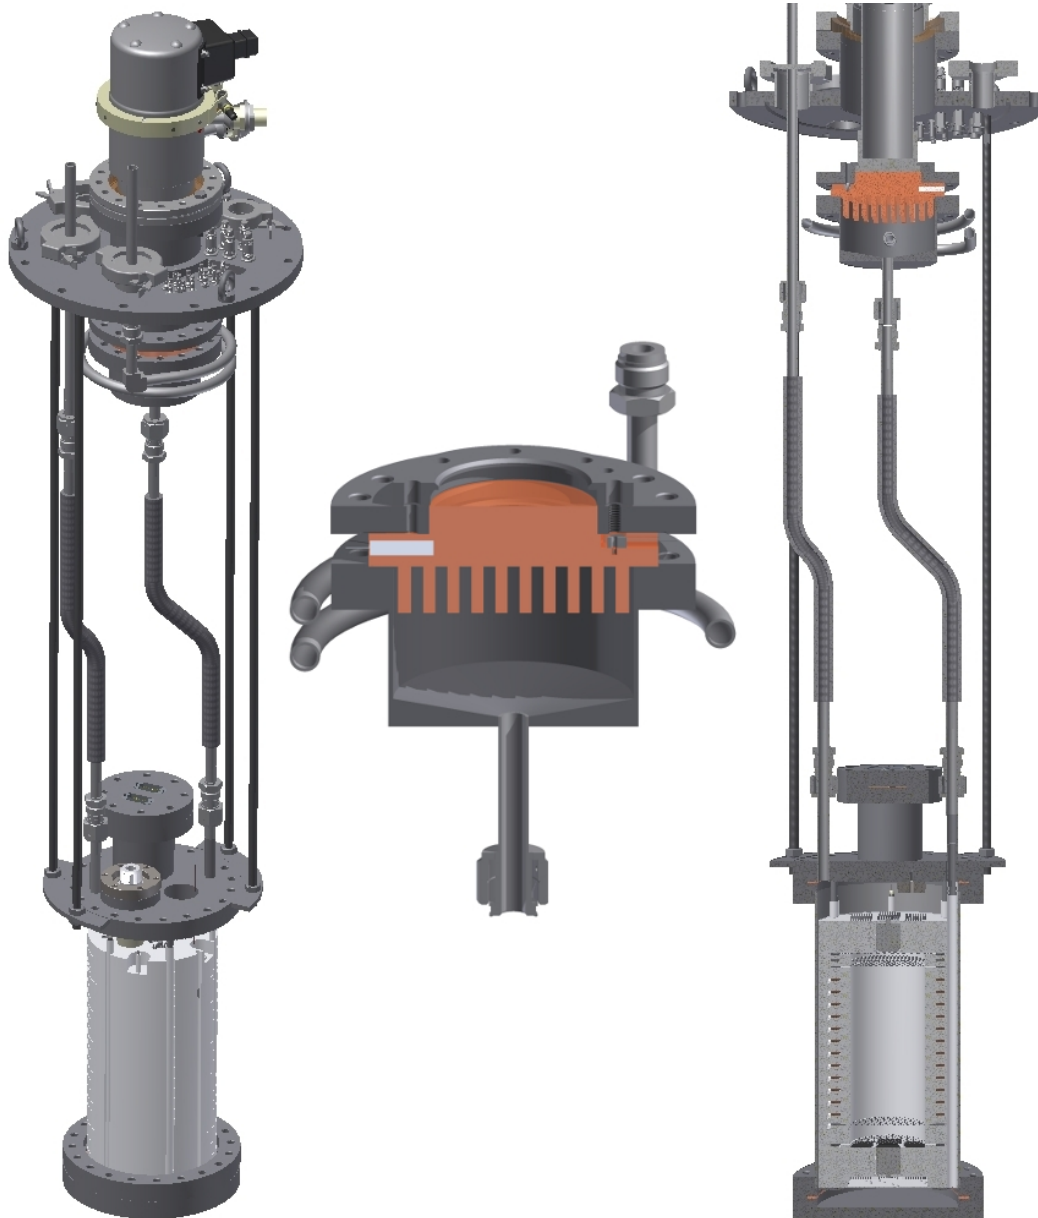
In this CAD-simulation, the inside of the vacuum cryostat is shown. The TPC cryostat tube is transparent and the PTFE structure becomes visible. On the right hand side, a sectional view of the setup shows the inner installations. In the center, a close-up sectional view of the cooling tower is shown.
